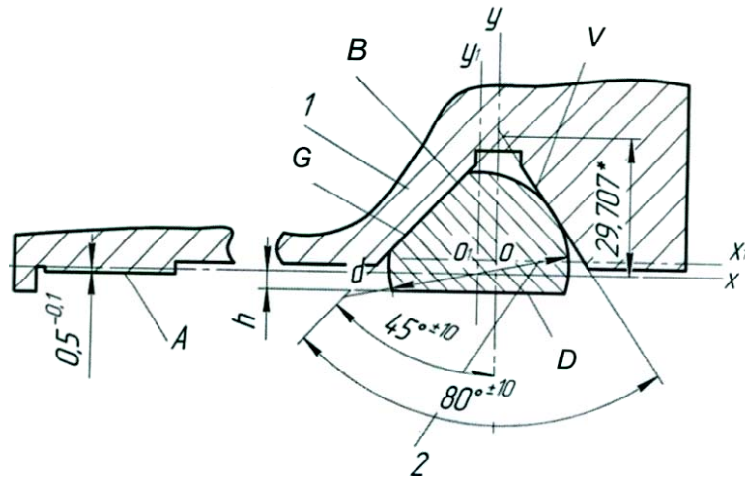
A new scheme of dimensioning of the tool carriage among FCS and NT-250I:
